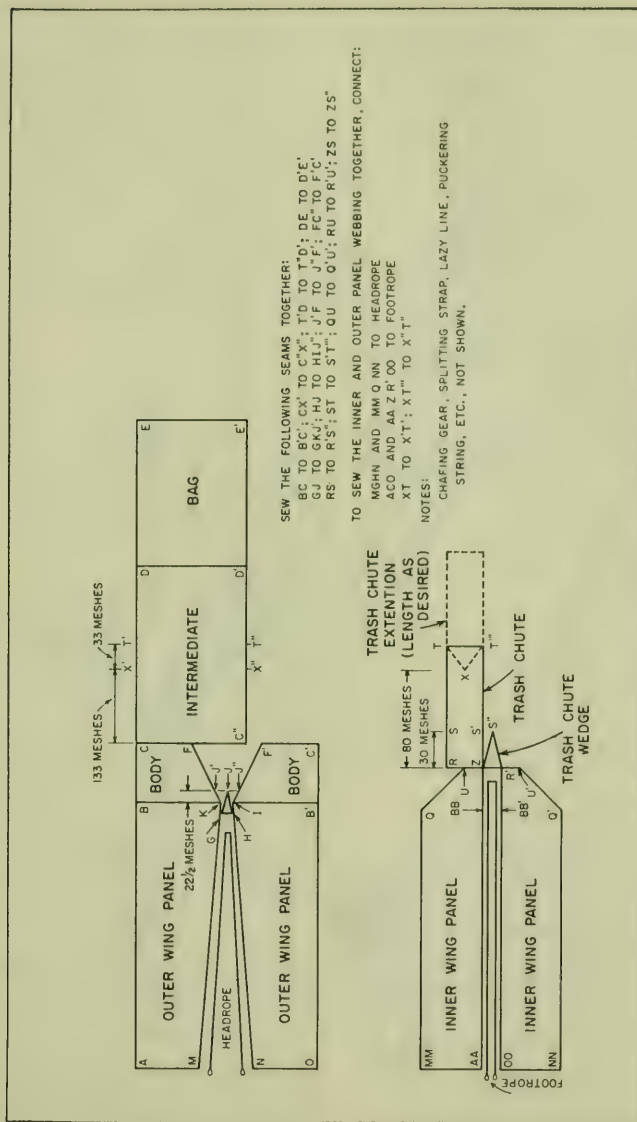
Sample construction plans for ECF shrimp sorting trawl.
